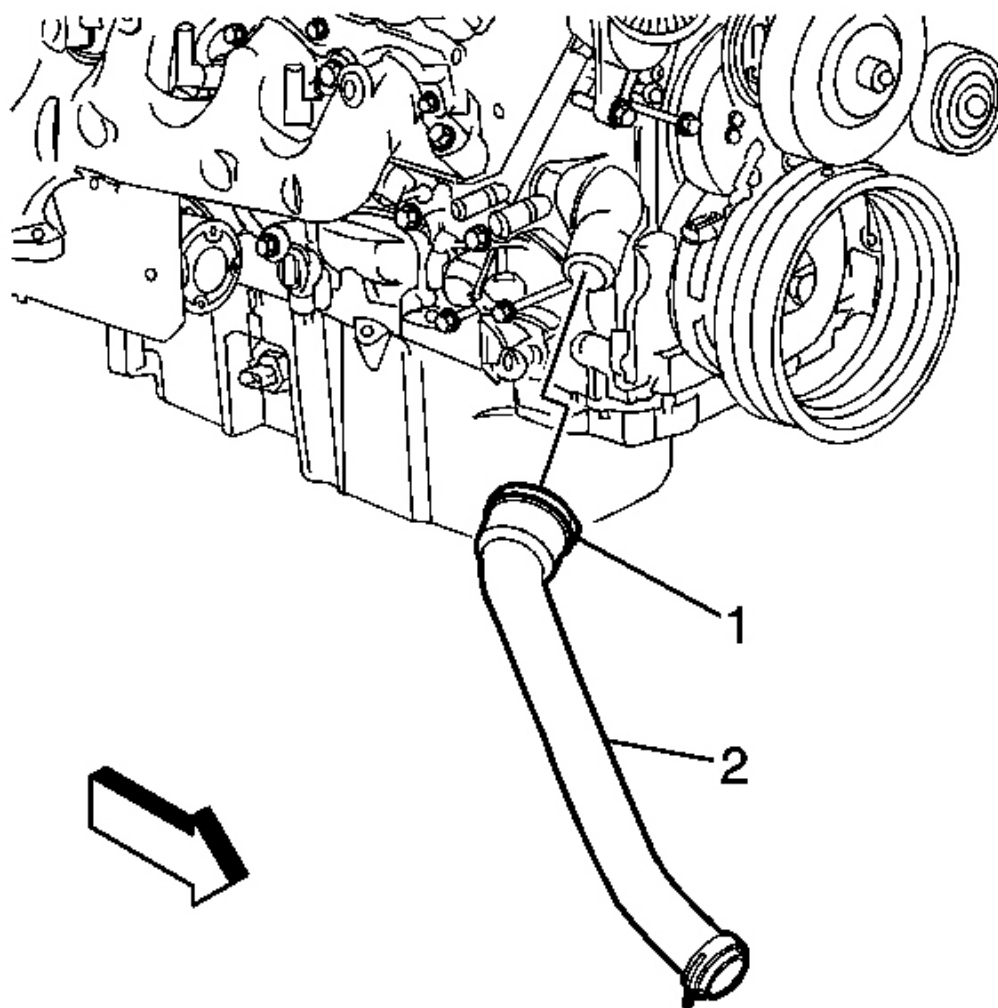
Radiator Outlet Hose & Clamp At Engine
